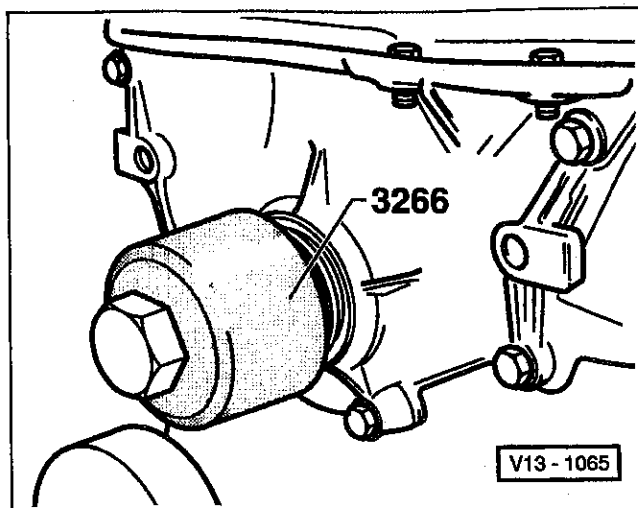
Front crankshaft oil seal being installed using Volkswagen special tool no. 3266.
